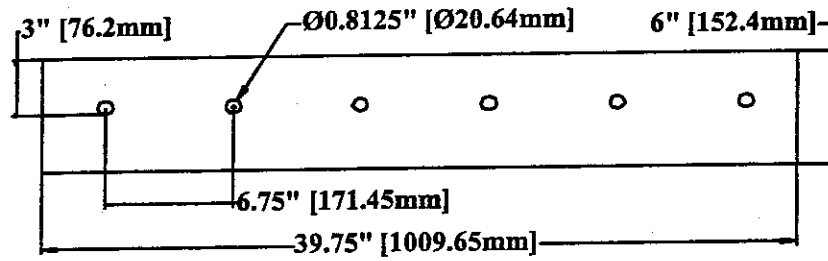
Long Piece for Cube Formwork Showing Dimensions and Hole Locations
